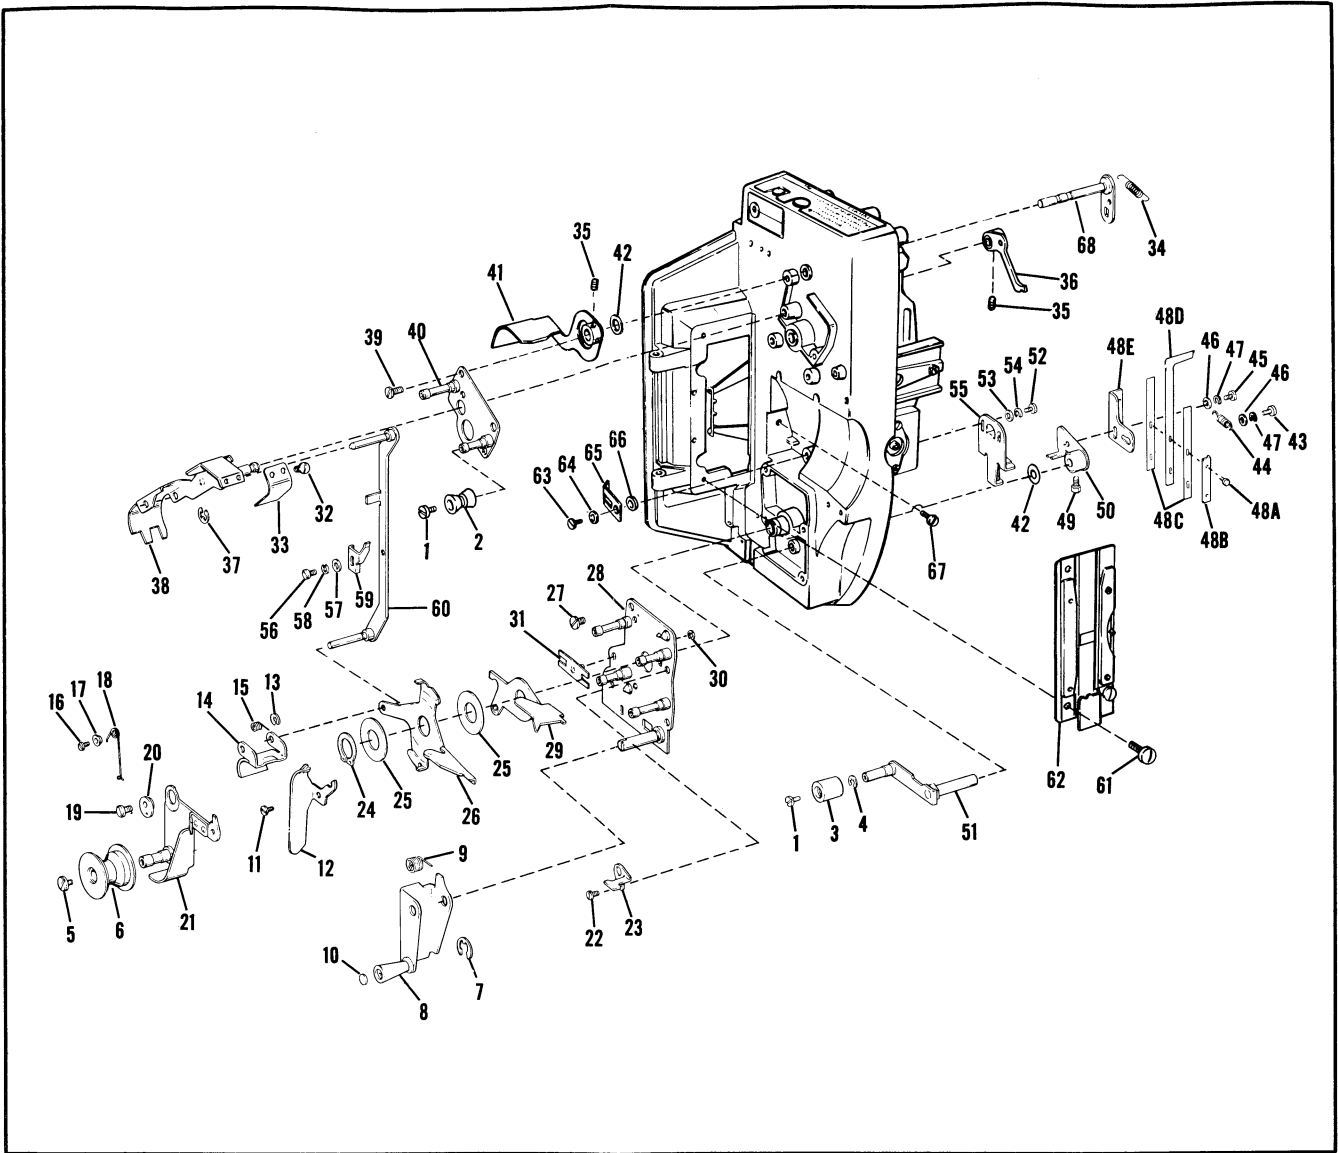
Mechanism Assembly, Complete (Sheet 2)
